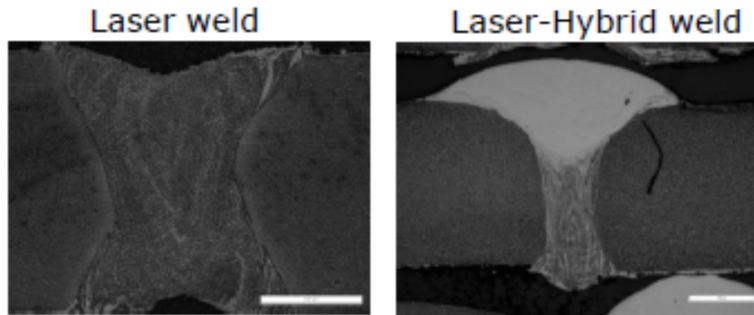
Cross section images from welds made in AlSi coated boron steel using pure laser welds and laser-hybrid with non-optimal process setup
